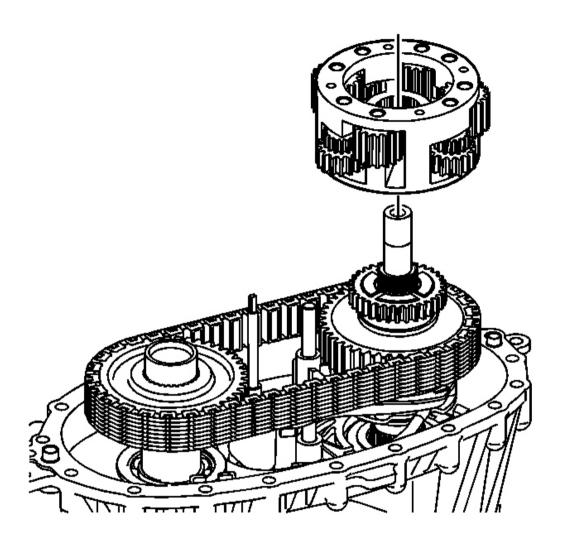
Planetary Differential Assembly Courtesy of GENERAL MOTORS CORP.
